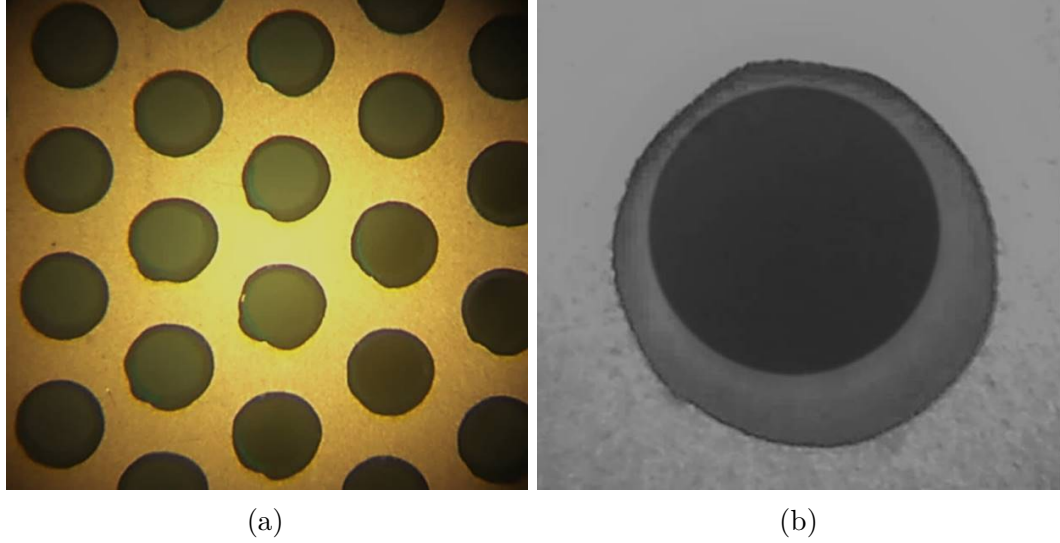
a) THGEMs with rim manufactured by MyroPCB Inc.. b) A microscopic view of a THGEM hole showing an off-center rim.
